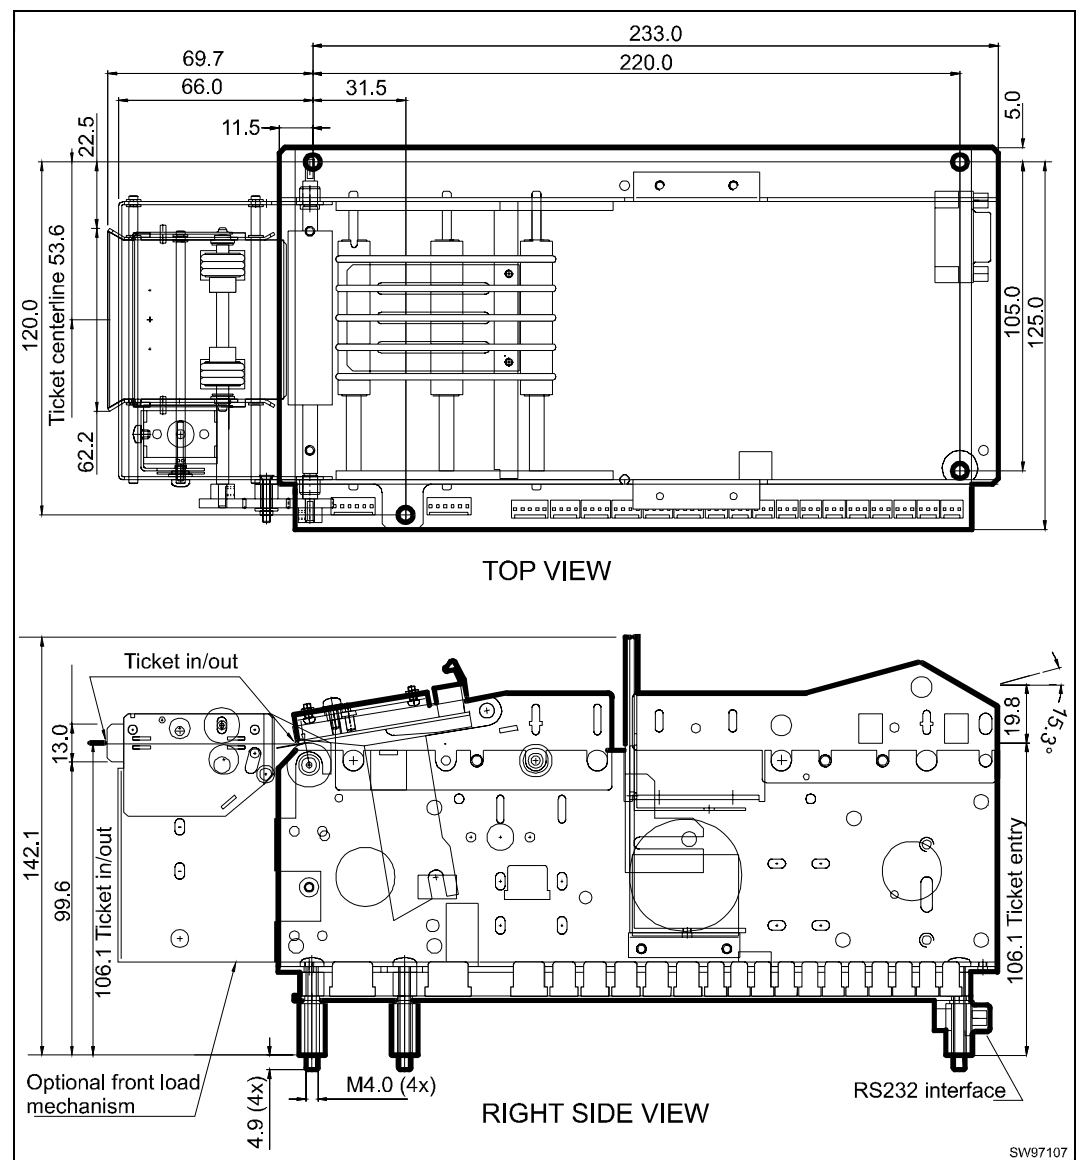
Dimension drawing for printer mechanism. All measurements are in mm
